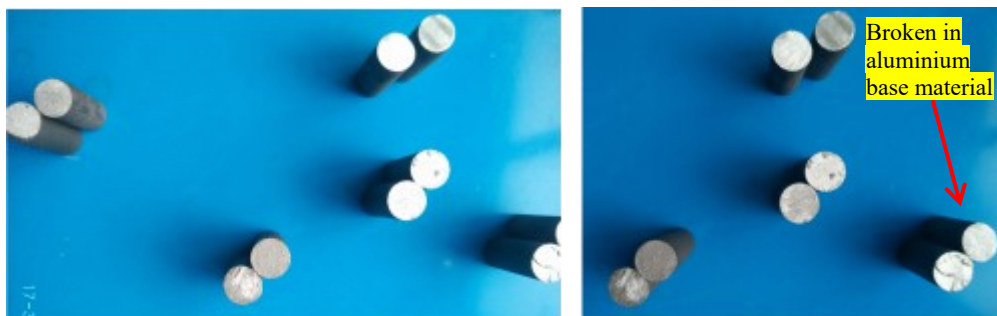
The macroscopic morphology of the shear specimen's fracture surface.
